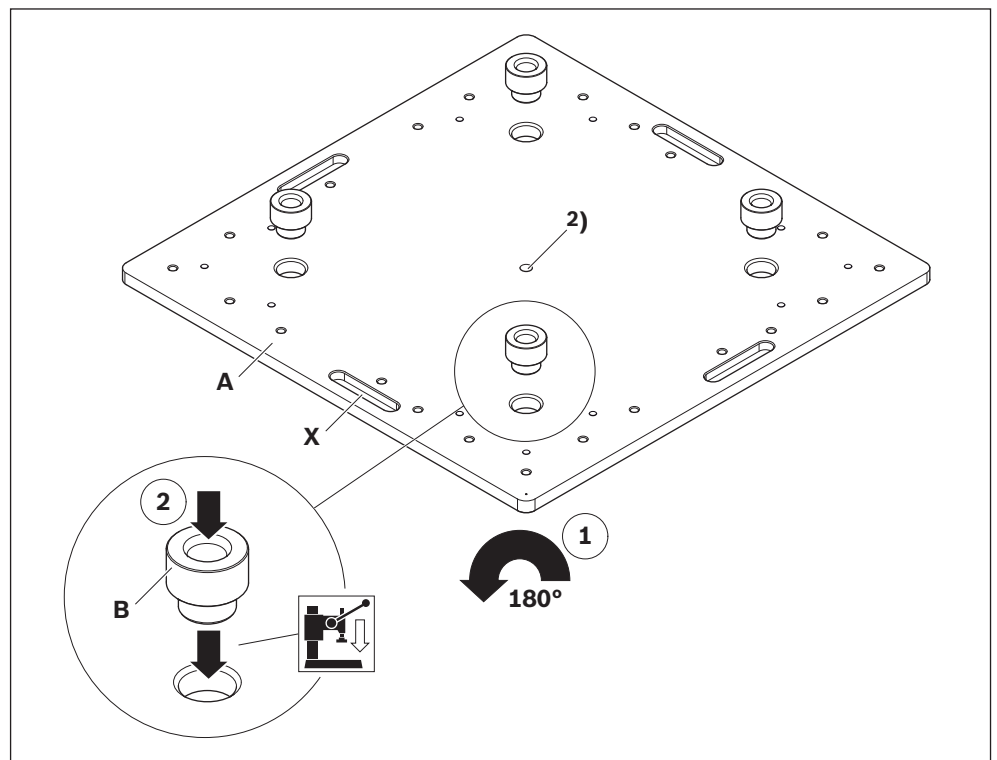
Workpiece pallet WT 2/H: Assemble the positioning bushings
